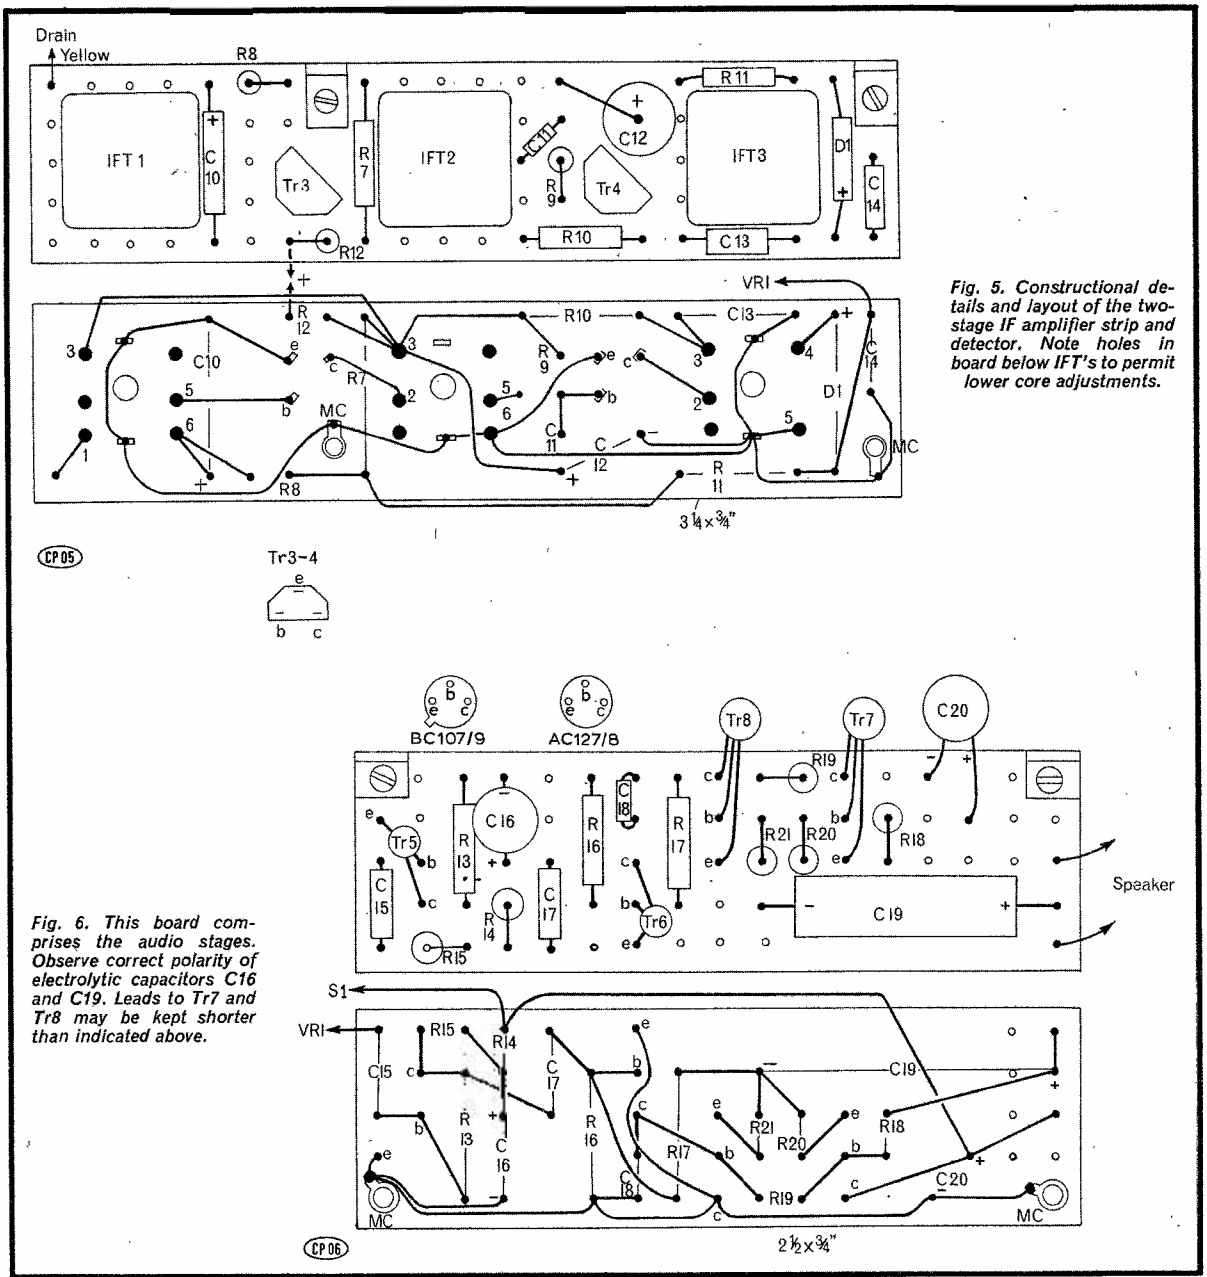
Constructional details and layout of the two-stage IF amplifier strip and detector. Note holes in board below IFT's to permit lower core adjustments.
